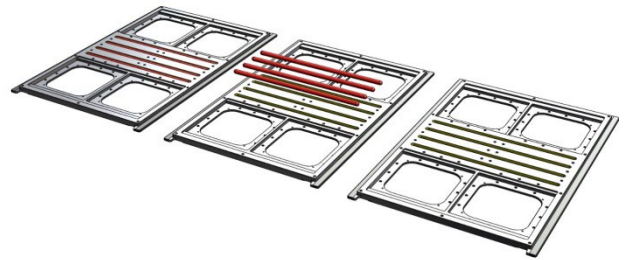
IHP manufacturing process. Chassis walls are machined as usual, and commercial heat pipes are inserted into grooved pockets. The figure shows an empty chassis plate (right), exploded view (mid), and integrated view (left).
